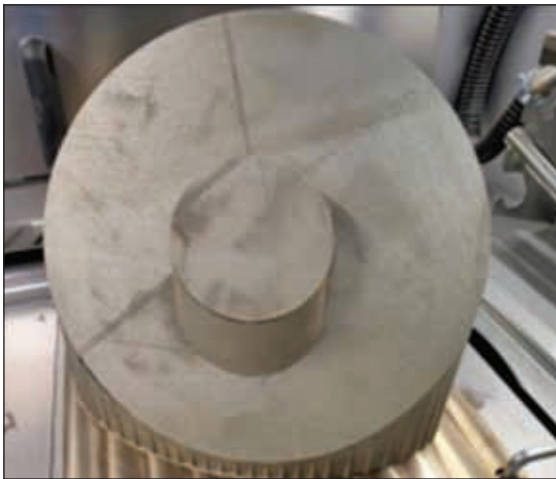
Over 300mm size impeller 3D printing in SS316L completed on M400-4.
